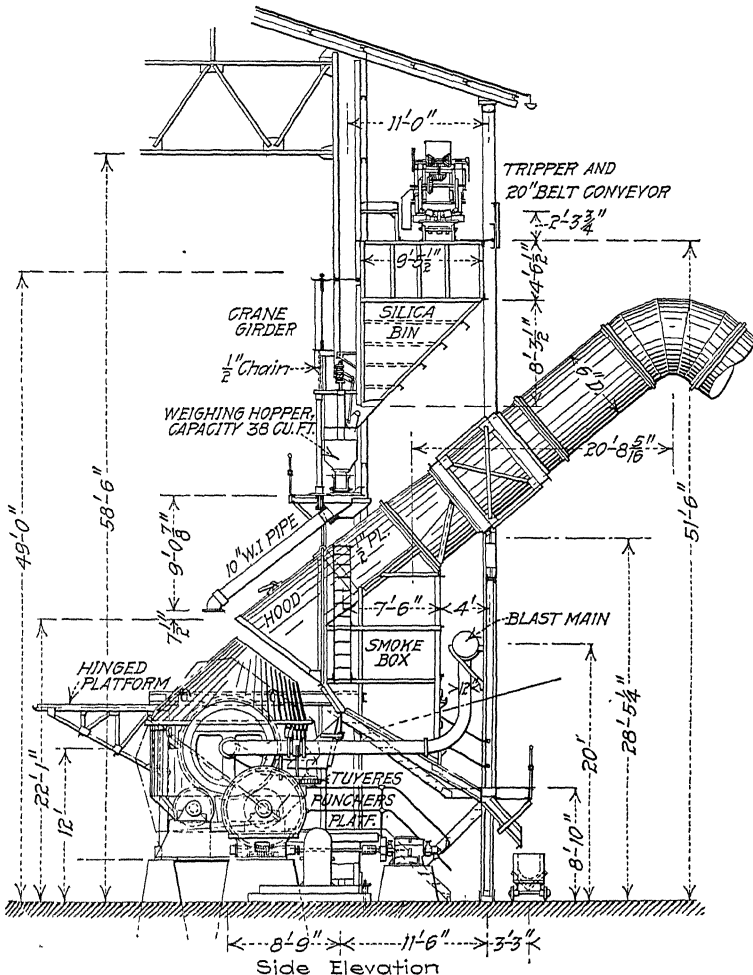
CONVERTER PLANT, INTERNATIONAL SMELTING CO.
